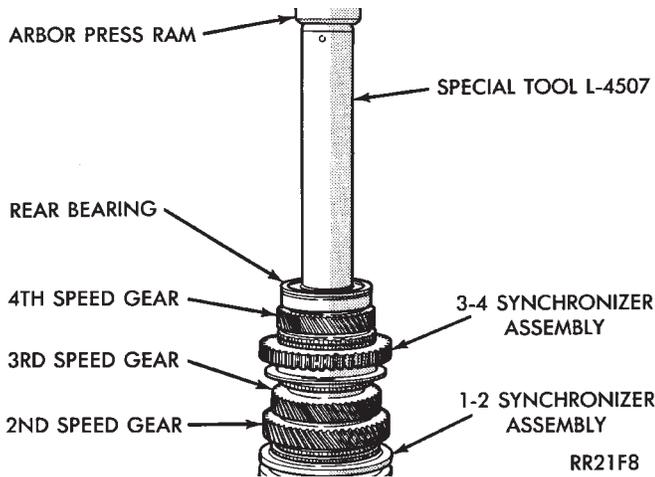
Remove Intermediate Shaft Rear Bearing
